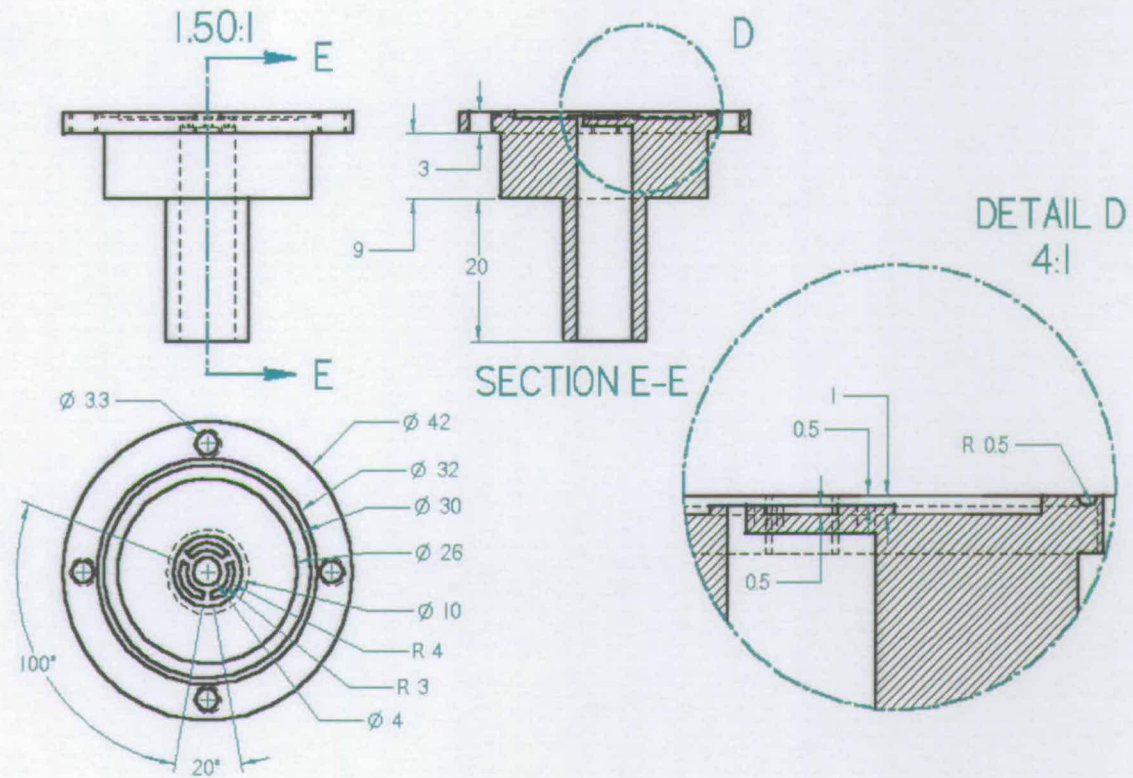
Injector Valve Seat Component (Dimensions in mm)
